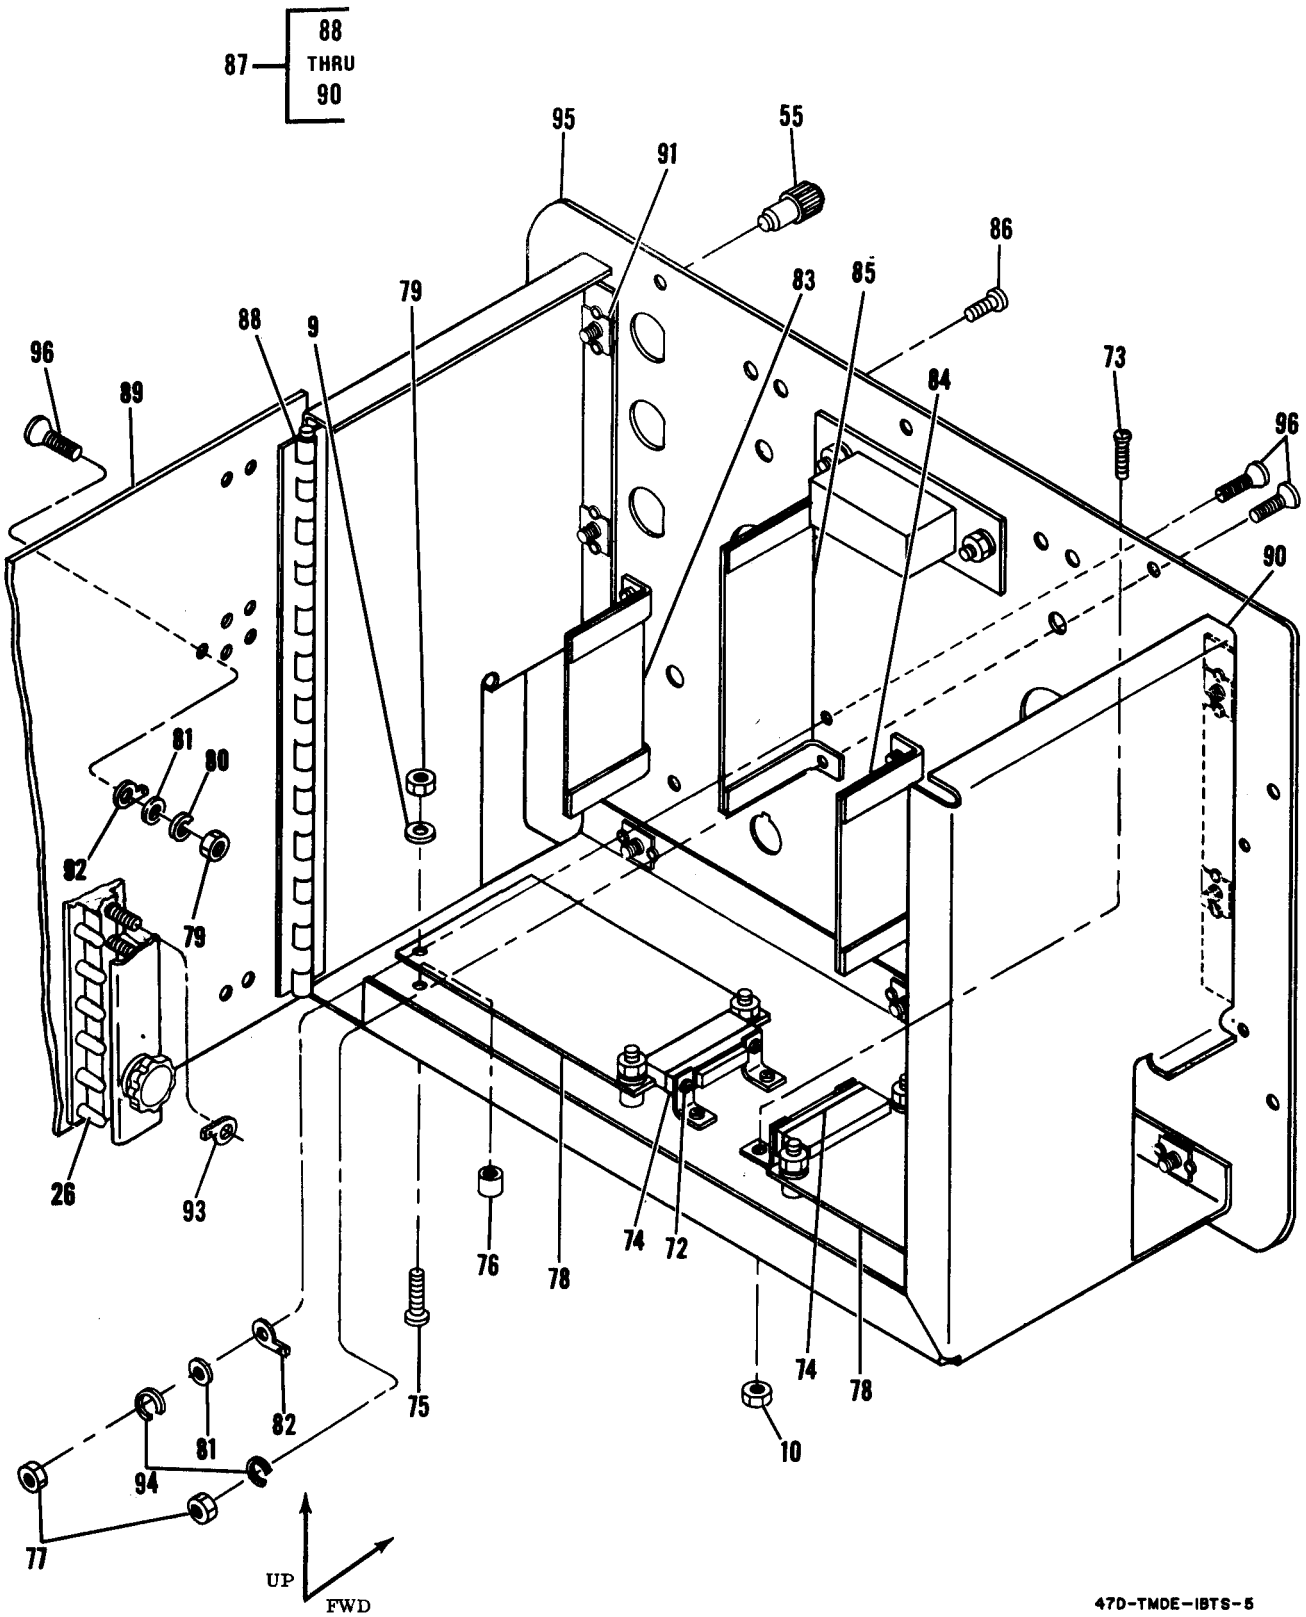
Chassis Assy, Electrical Unit (Sheet 1 of 3)
